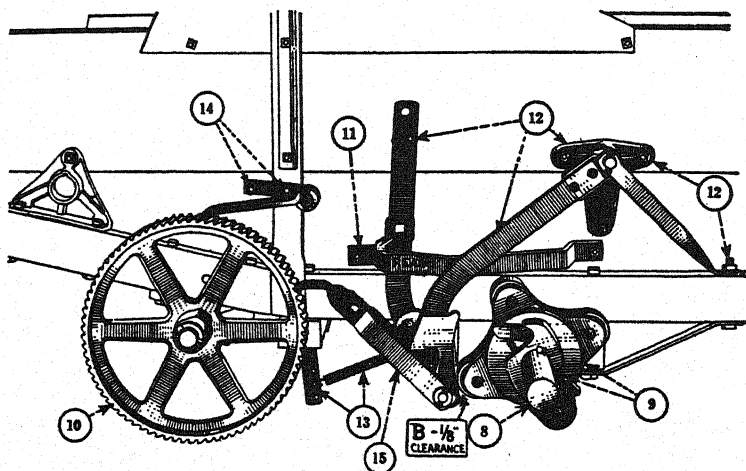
Apron drive. 8—Main axle. 9—Four-point drive cam. 10—Ratchet-wheel conveyor drive. 11—Guide bracket for cam arm. 12—Rocker-arm assembly. 13—Spring and anchor. 14—Ratchet-wheel stop. 15—Ratchet-wheel drive pawl.
